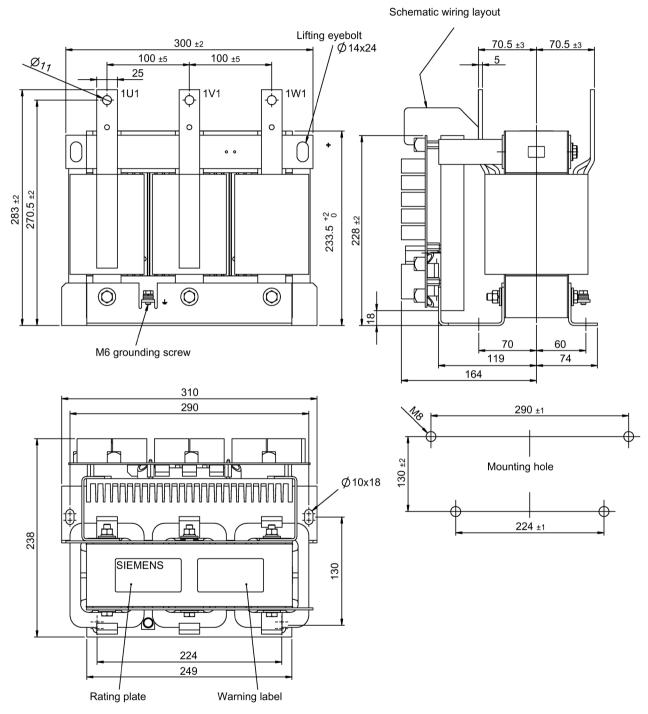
Dimension drawing for dV/dt filter compact plus voltage peak limiter, type 1
